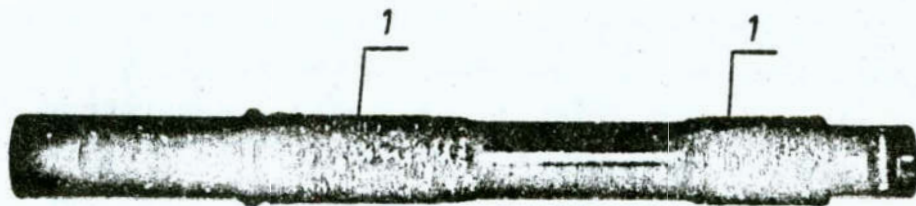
King - pin 005/01-522/0 - constructional drawing
